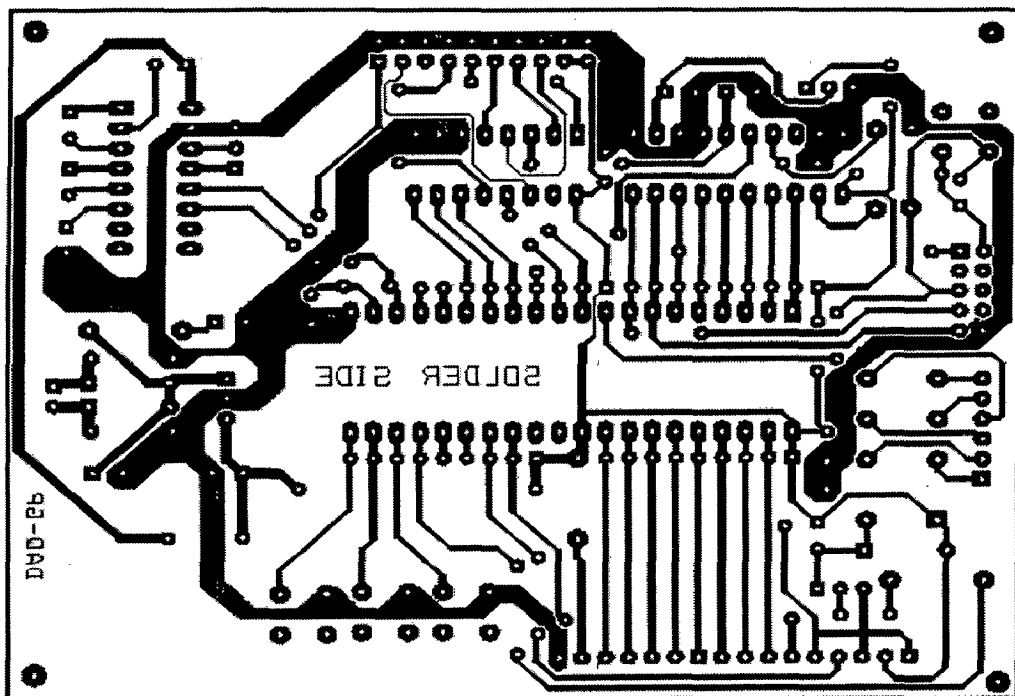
Diagram showing tracks of the solder side of the PCB
